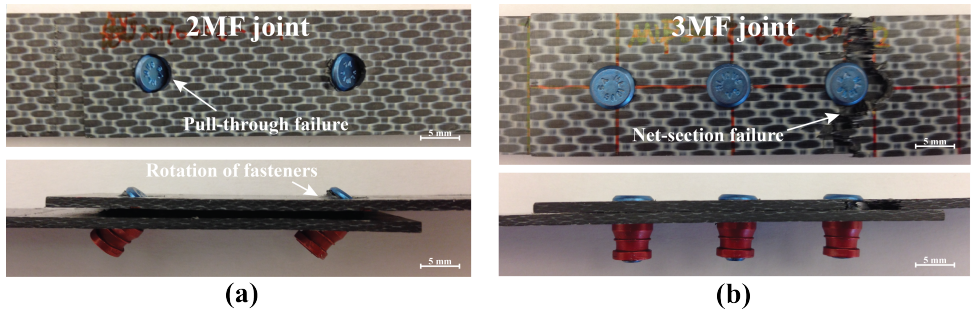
Failure mode transition from (a) the 2MF (pull-through failure) to (b) the 3MF joint (net-section failure).
